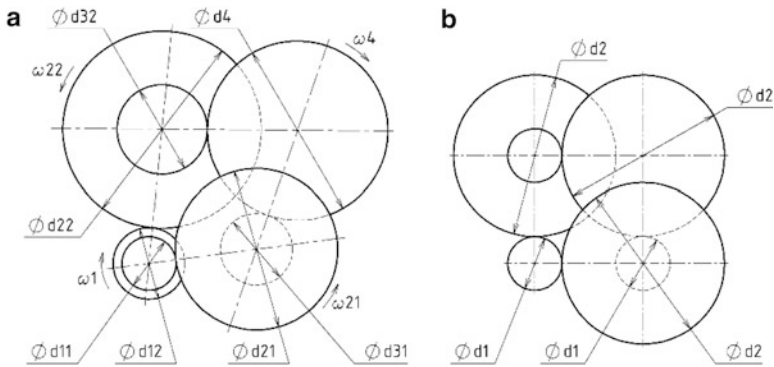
Mounting conditions (a) general case, (b) prototype design
